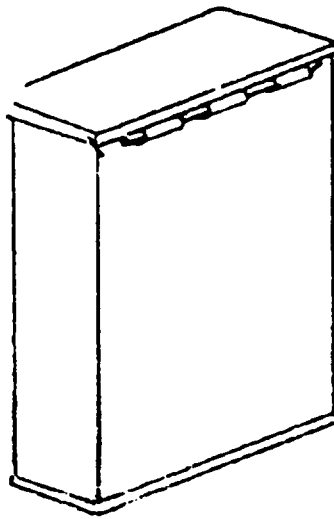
TYPE VI, DRY DOUBLE-SEAMED END WITH HINGED CLOSURE.
